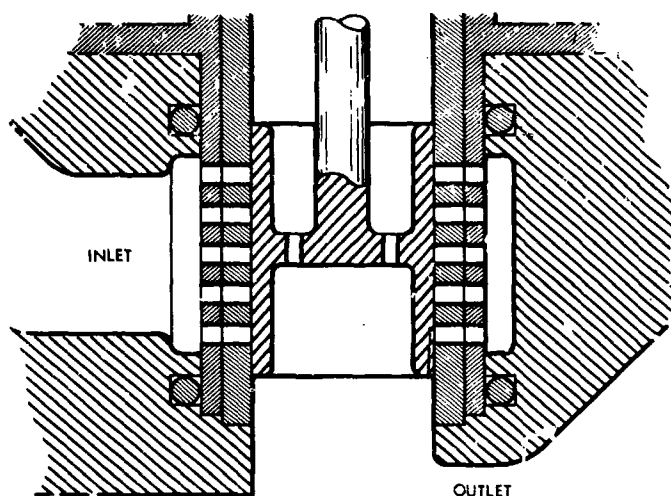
Piston Metering Valve for Regulator
